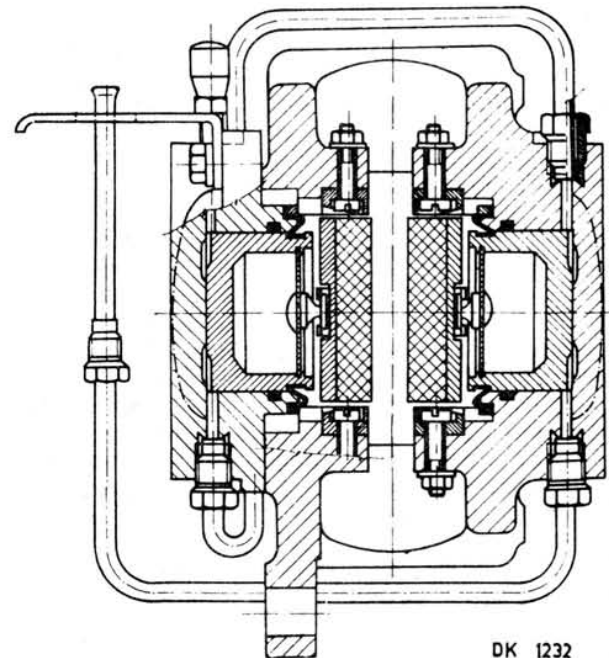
/1 - Front Brake Wheel Cylinder c/w Brake Pads
